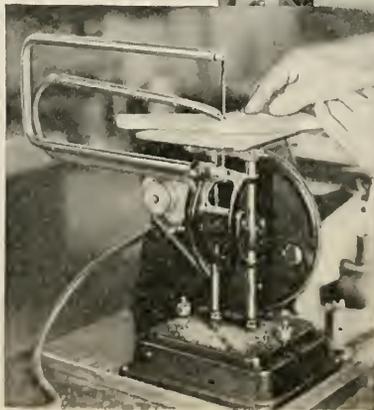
(at left).—Cutting the inside of the handle on the jig saw is as simple as guiding a sewing machine.
